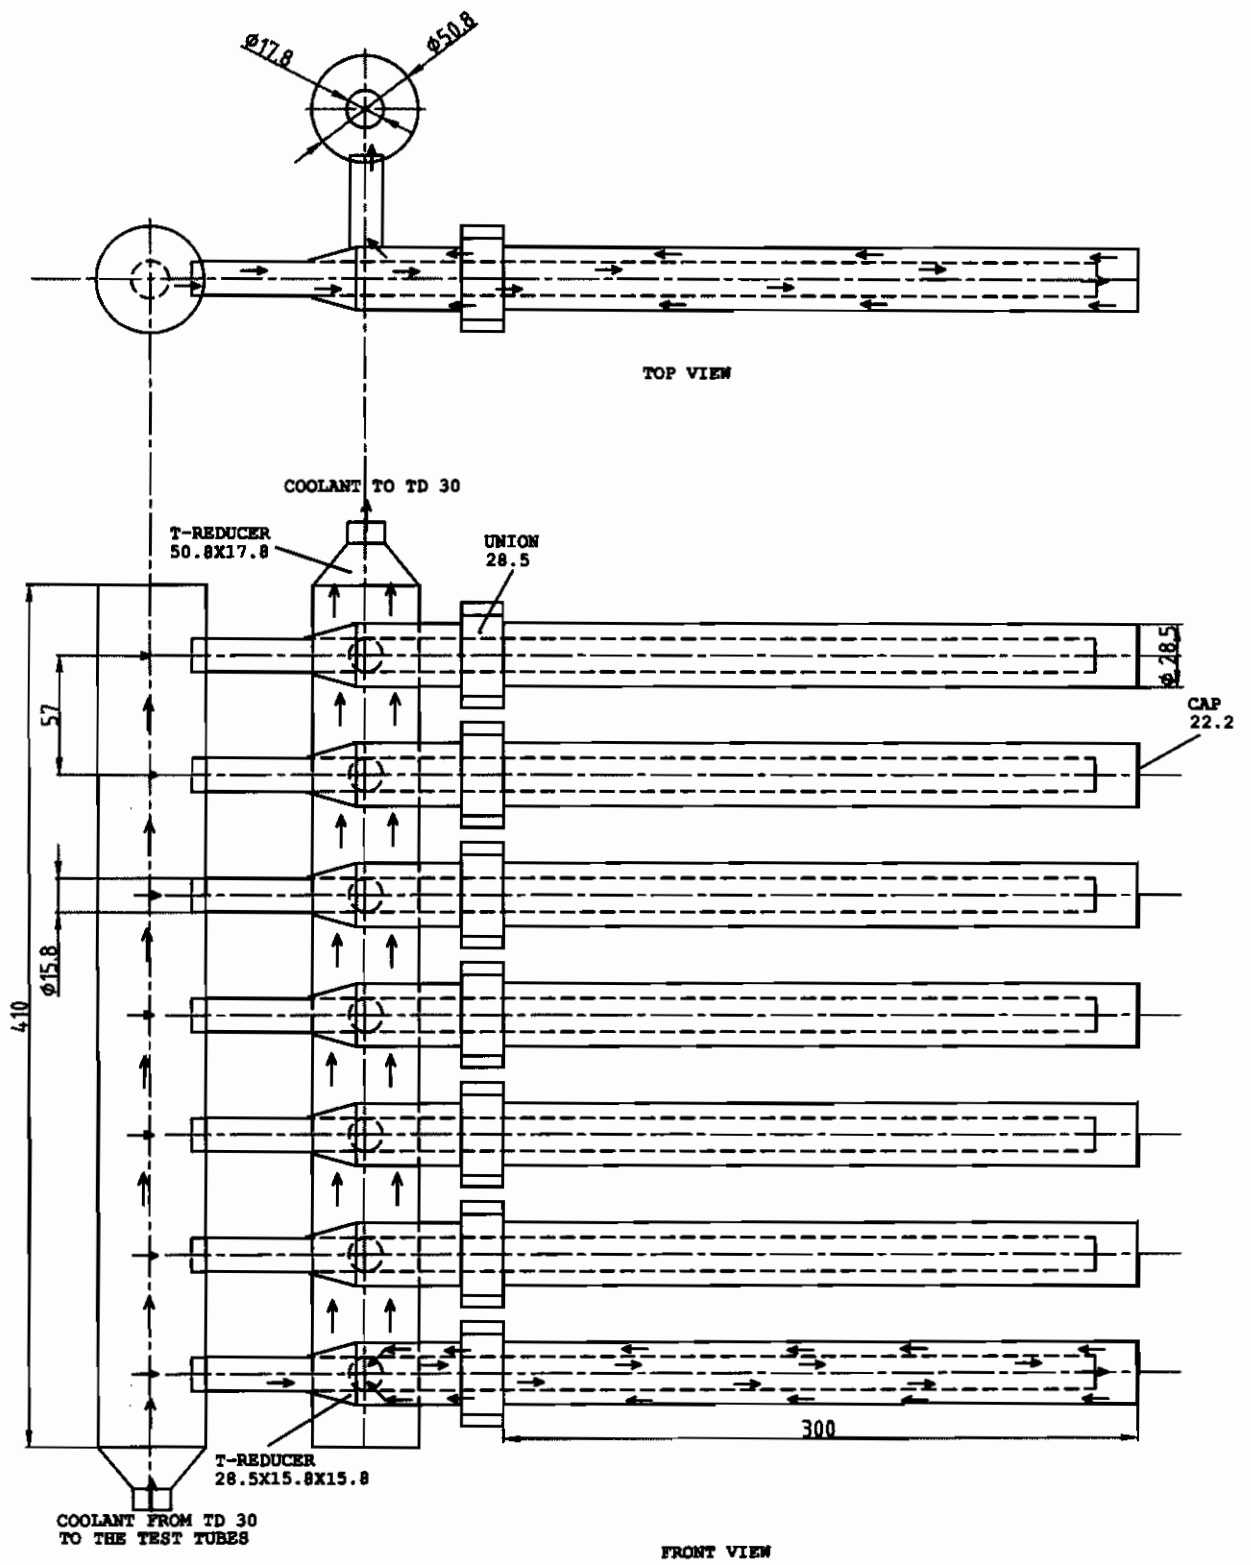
A schematic of the parallel arrangement of the test tubes
